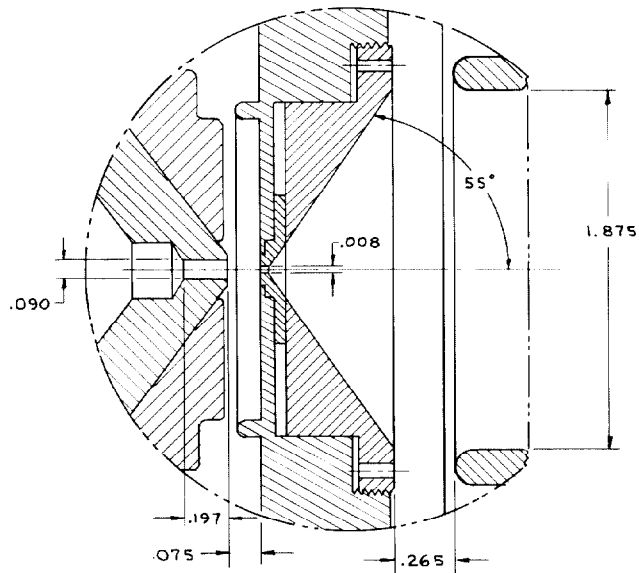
Exploded View of Dynamag Extraction Geometry.
